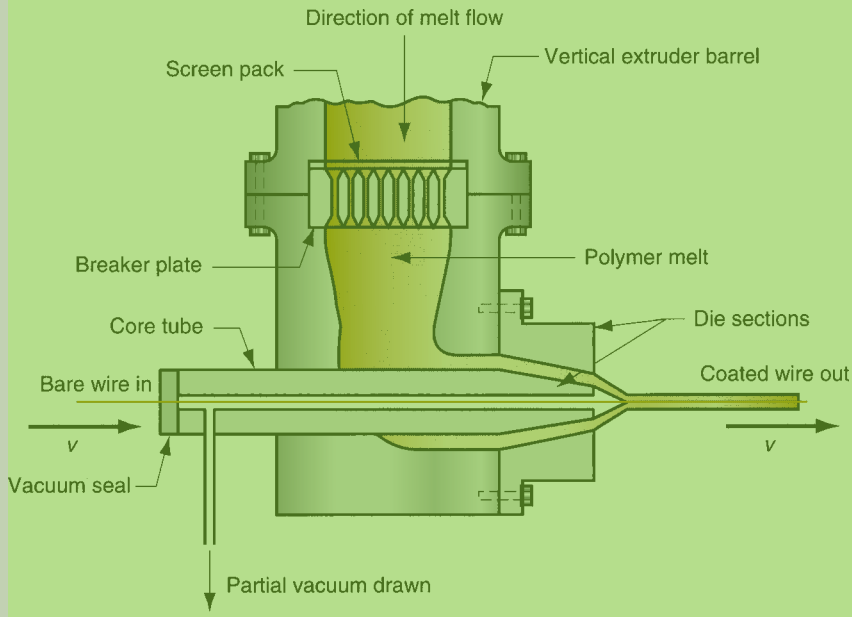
Side view cross section of die for coating of electrical wire by extrusion. (Some die construction details are simplified.)
